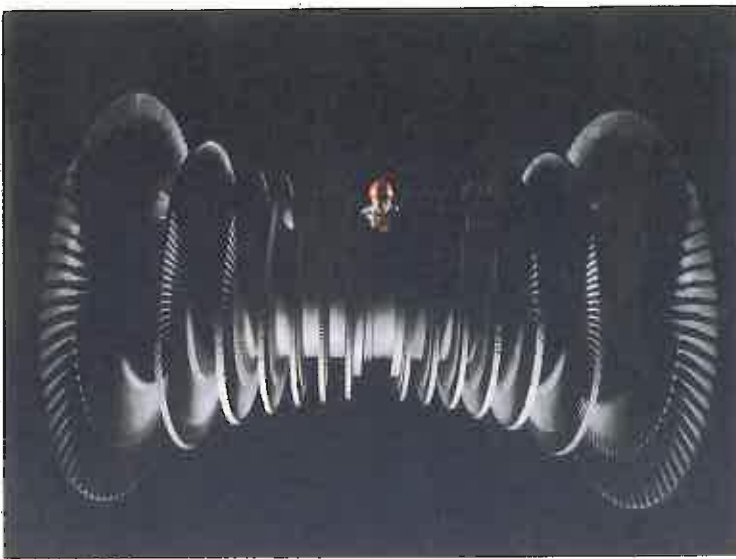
Turbine blades used in a steam turbine engine. *Courtesy of Union Electric Co.
